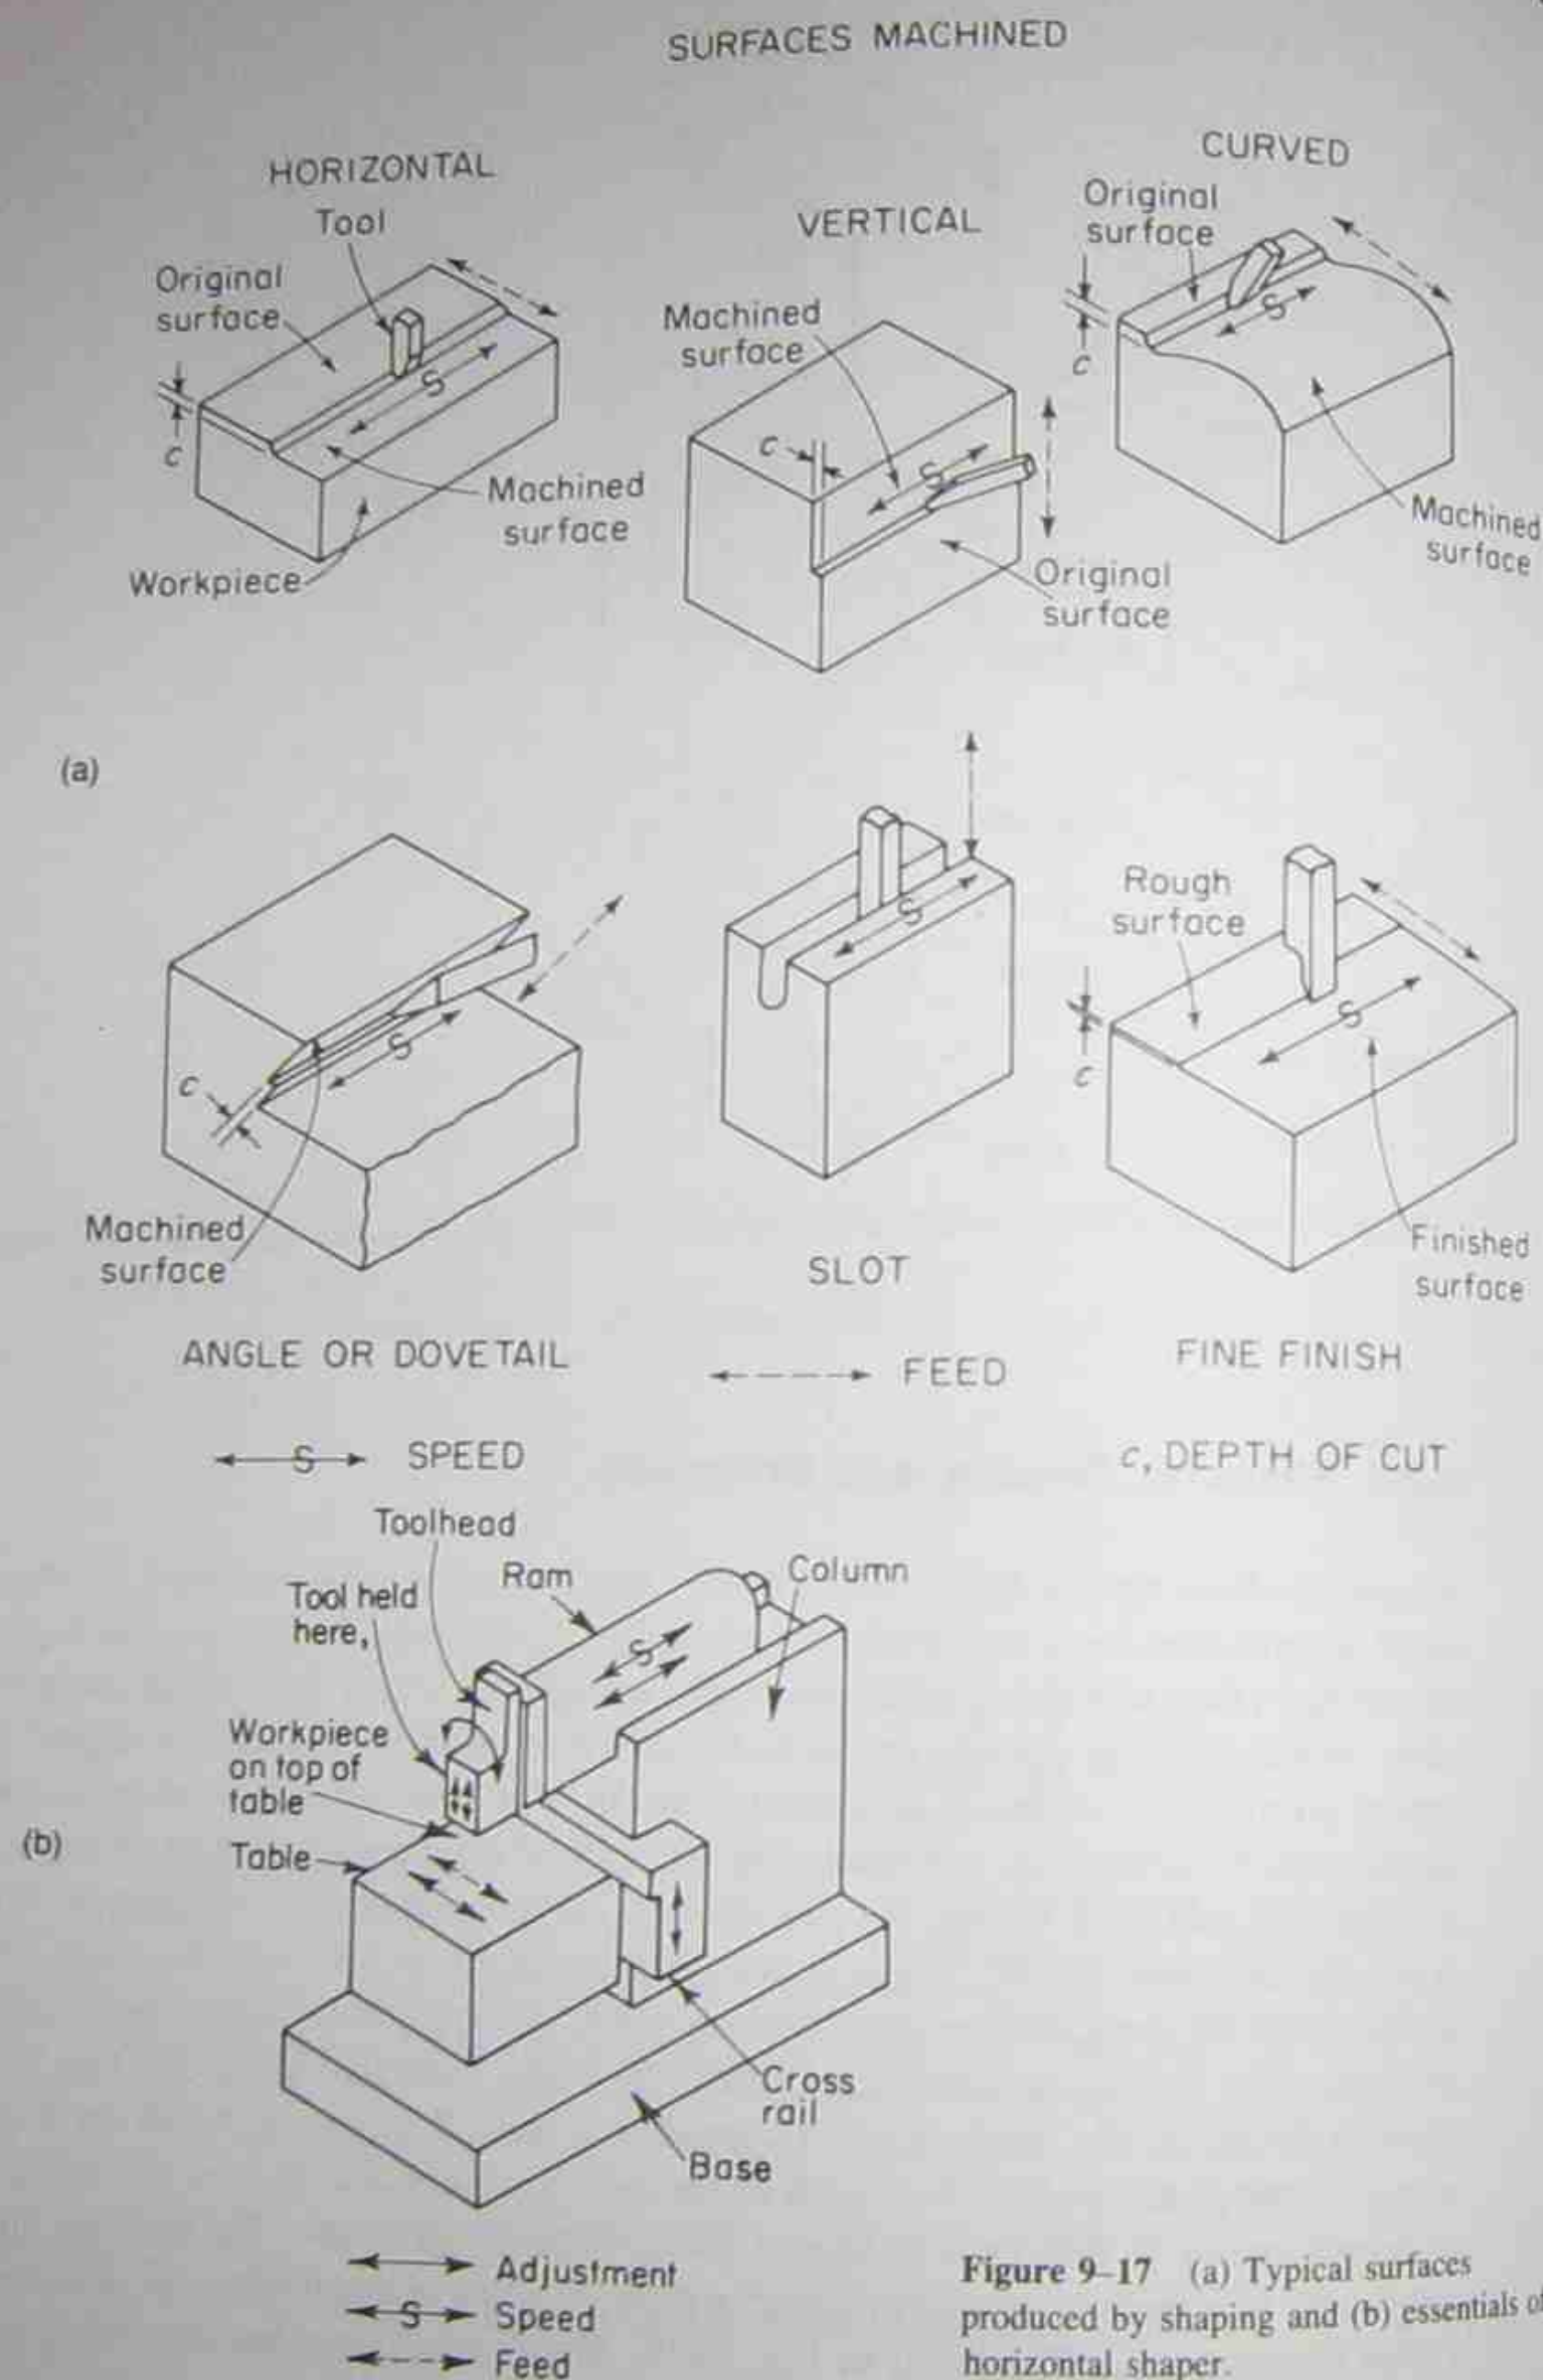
(a) Typical surfaces produced by shaping and (b) essentials of a horizontal shaper.
